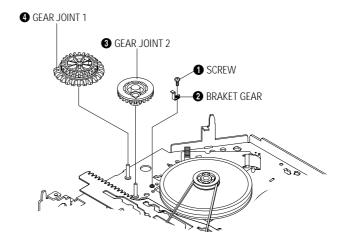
Bracket Gear, Gear Joint 1,2 Removal
